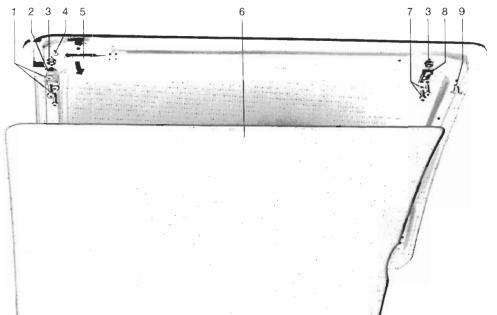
Components of sliding roof panel (viewed from right-hand side).
